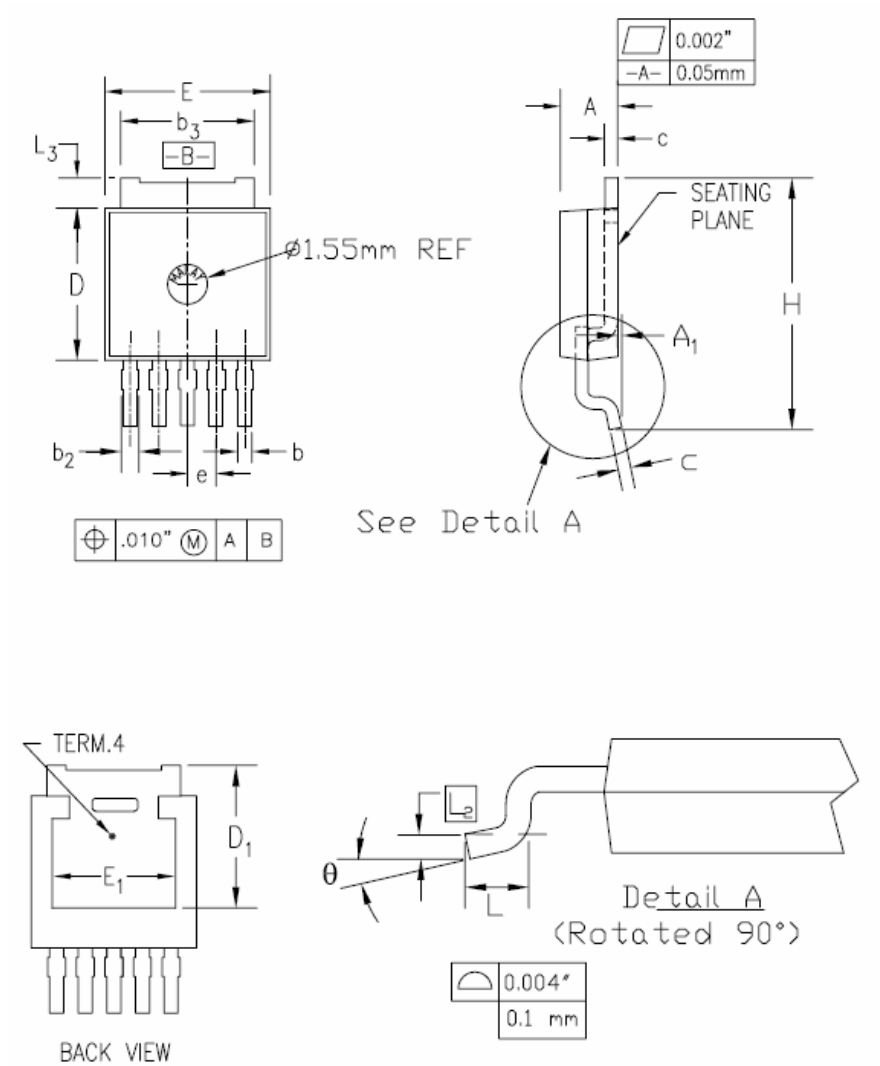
88PL810/88PL815/88PL830 DPAK mechanical Dimensions
